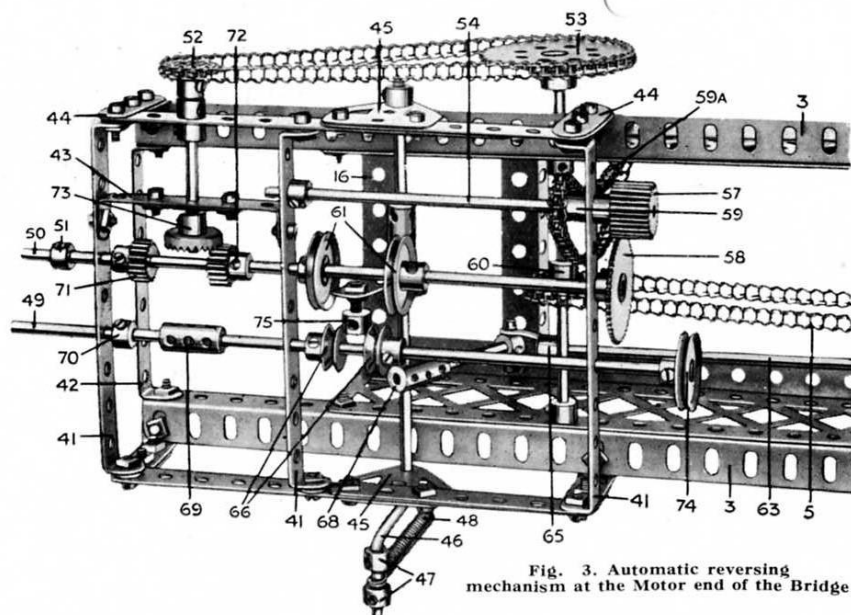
Automatic reversing mechanism at the Motor end of the Bridge
